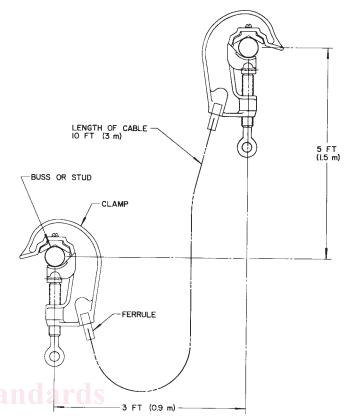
Fixture for Testing Ground Clamps, Ferrules, Cables, and Jumpers
